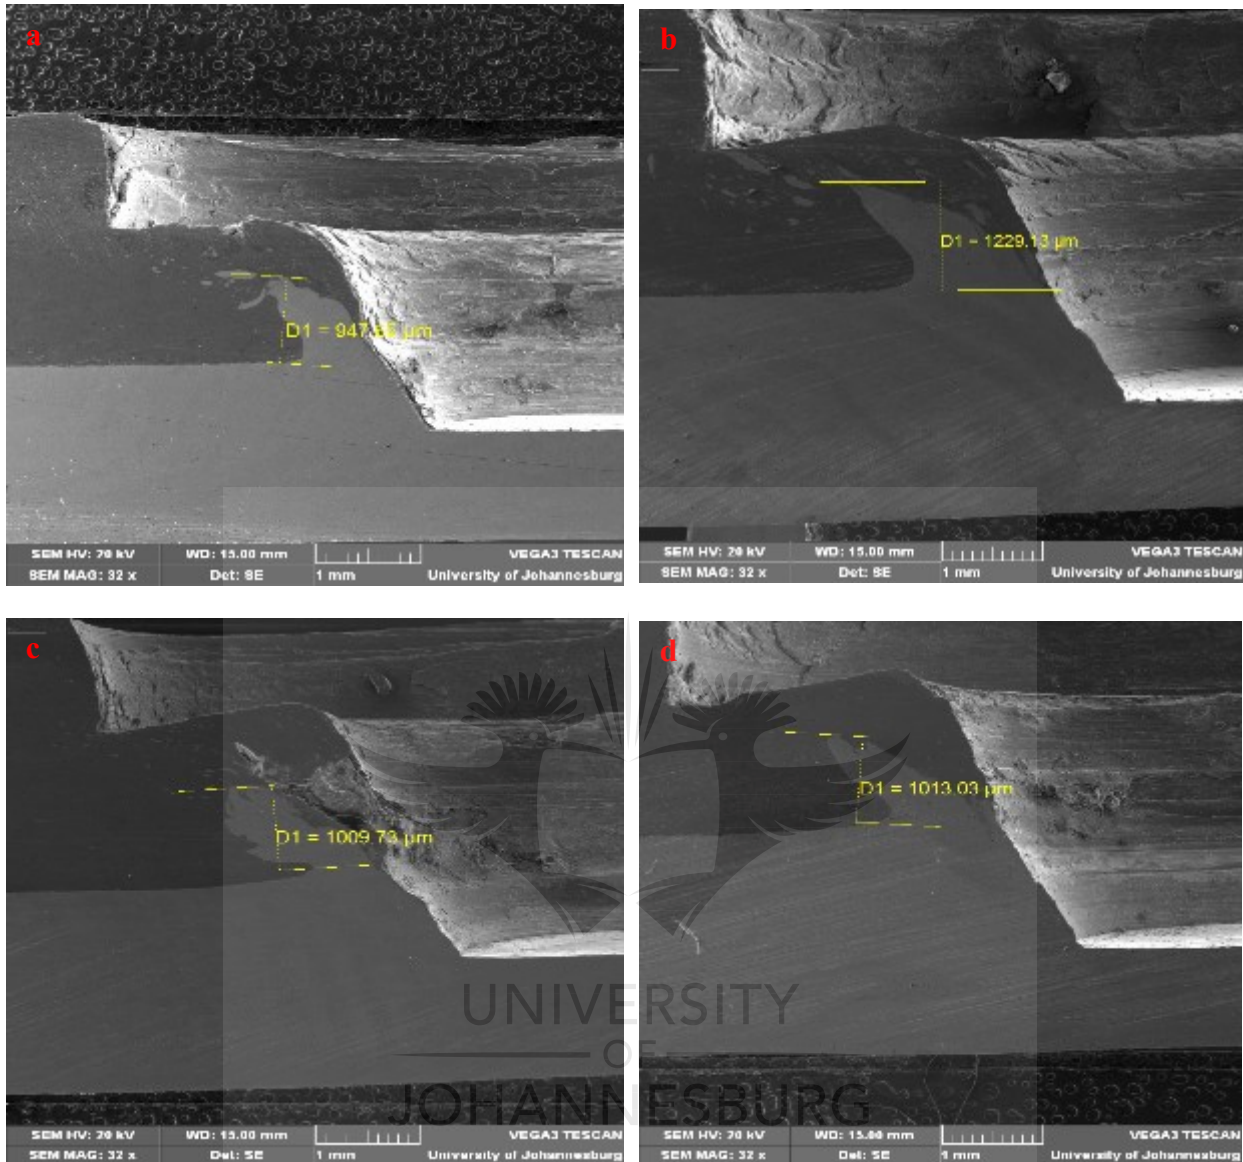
Copper ring length of the spot weld produced: (a) 800 rpm, 0.5 mm, (b) 800 rpm, 1 mm, (c) 1200 rpm, 0.5 mm and (d) 1200 rpm, 1mm using a conical pin and concave shoulder tool
